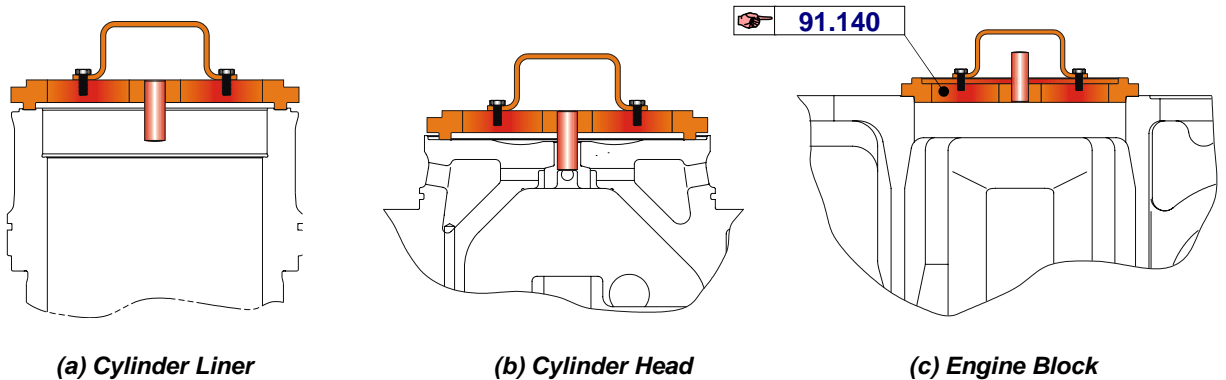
Mounting of the grinding tool (그라인딩 공구의 설치)
